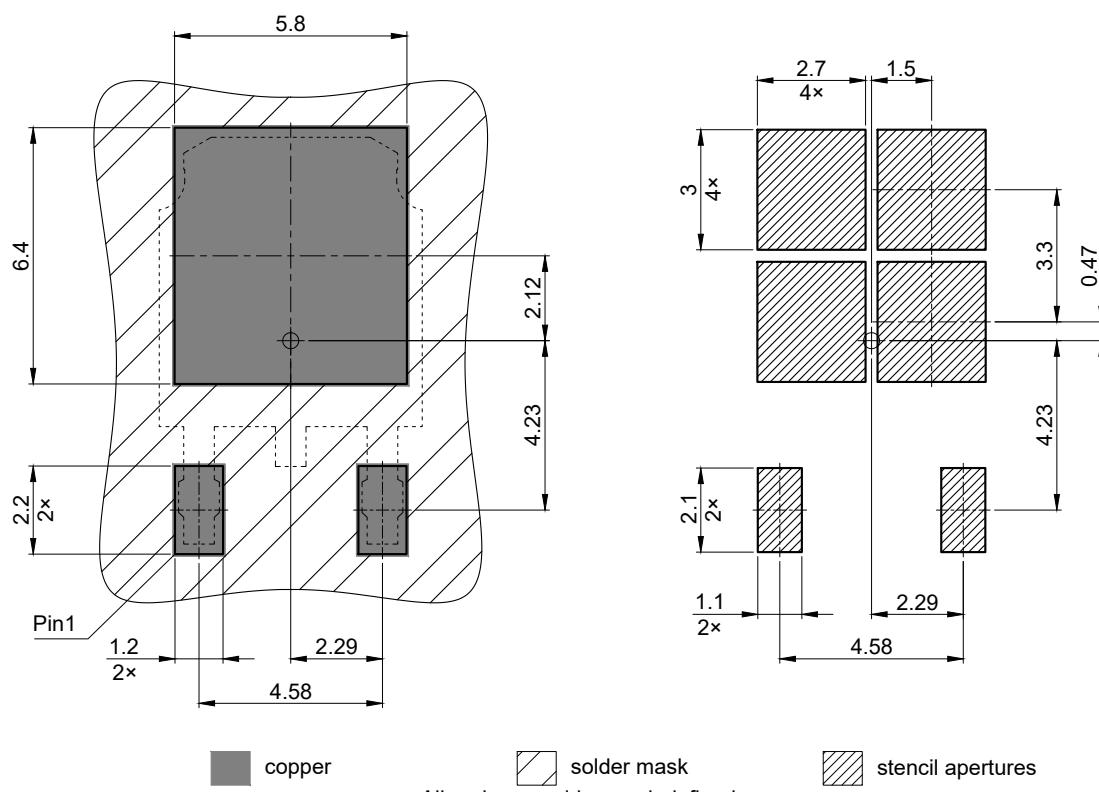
Footprint Drawing PG-T0252-3, dimensions in mm
